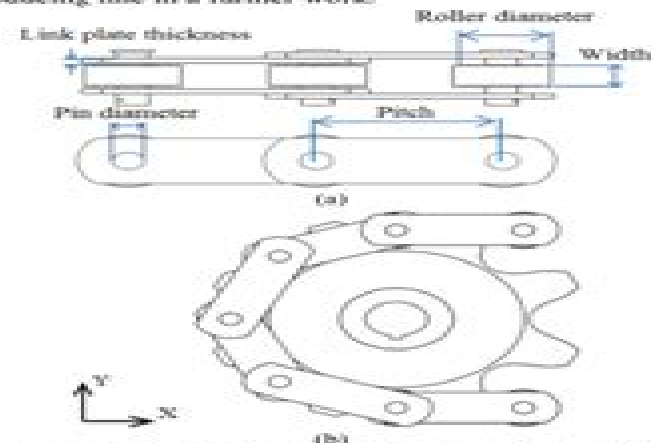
CAD model description of: (a) roller chain and (b) roller chain drive system.
